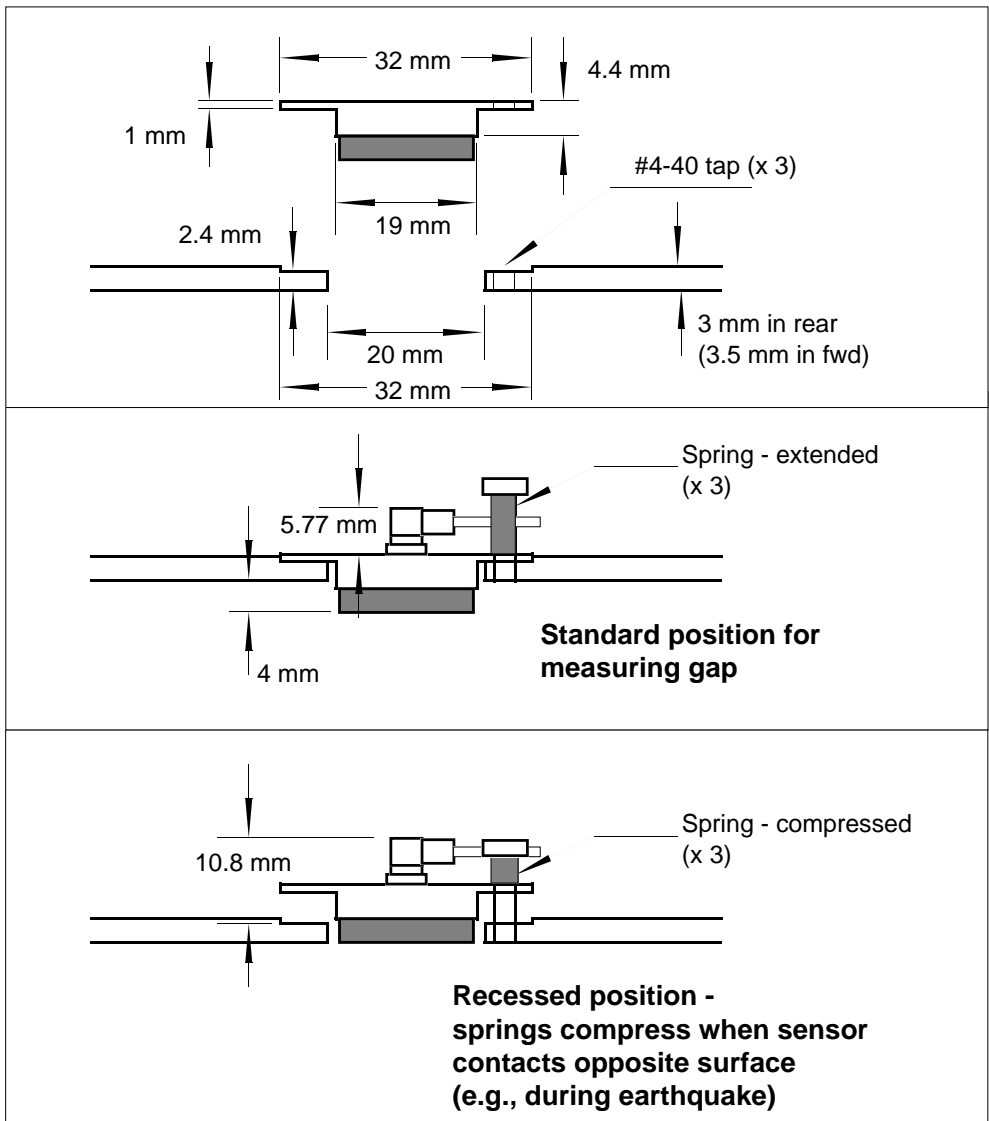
Conceptual design of the sensor mounts for the drift chamber, to be used in the penetration holes in the inner cylinder shown in the previous figure.
